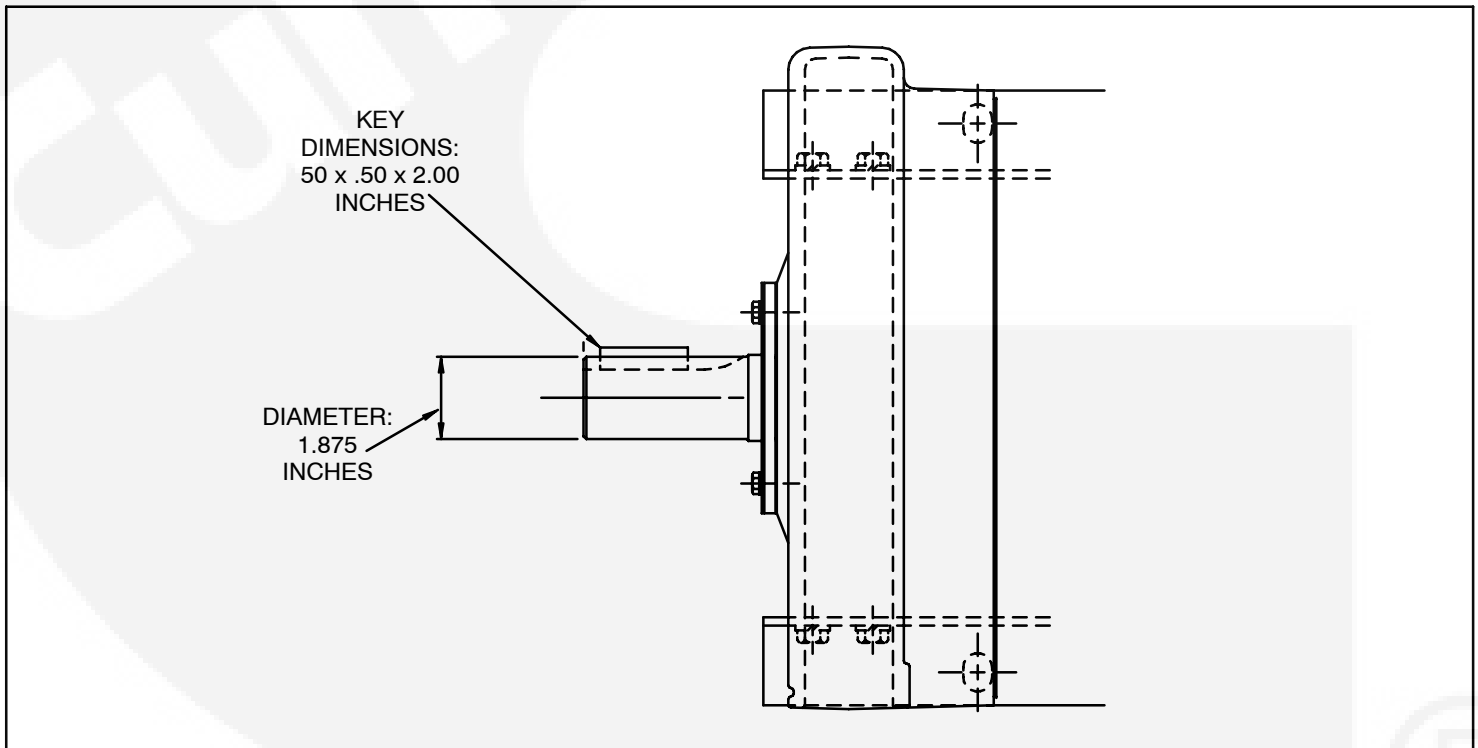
DETAIL OF GENERATOR SHAFT AND MOUNTING KEY
